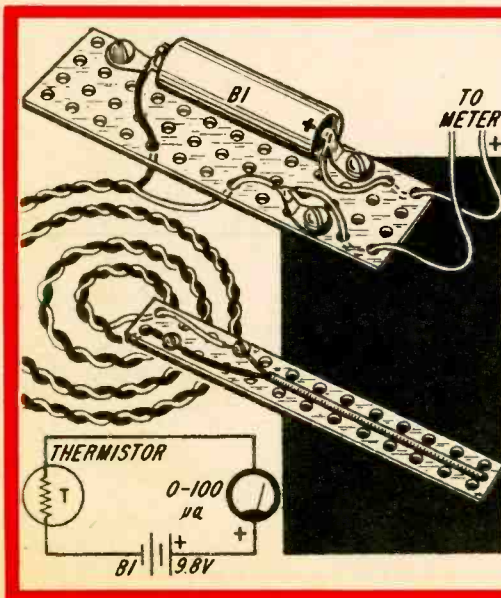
Probe for our thermometer is made by mounting probe-type thermistor on a ½ x 3½-in. piece of perforated board. Actual thermistor is the black dot on probe tip at the extreme left.
